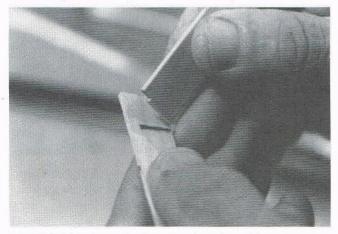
Instead of cutting the joint with a razor saw you will have to cut the lines to the proper depth with a knife tip. The front edge of the joining board is notched to the depth of the dado.
